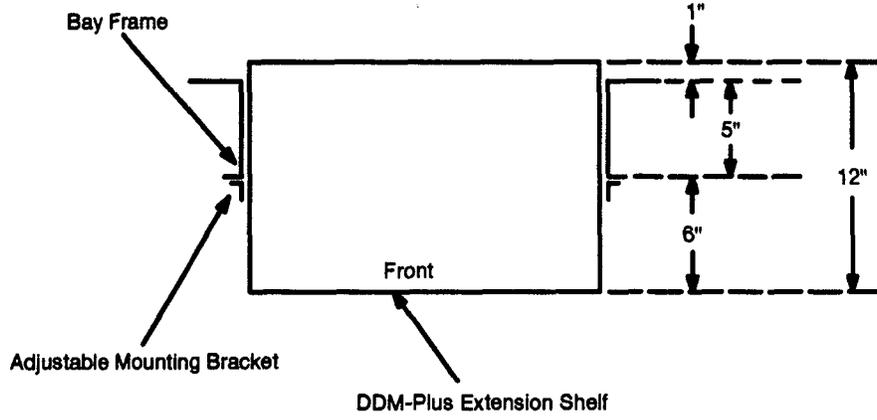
ED-8C500-50 — Front Mount with Front Access
